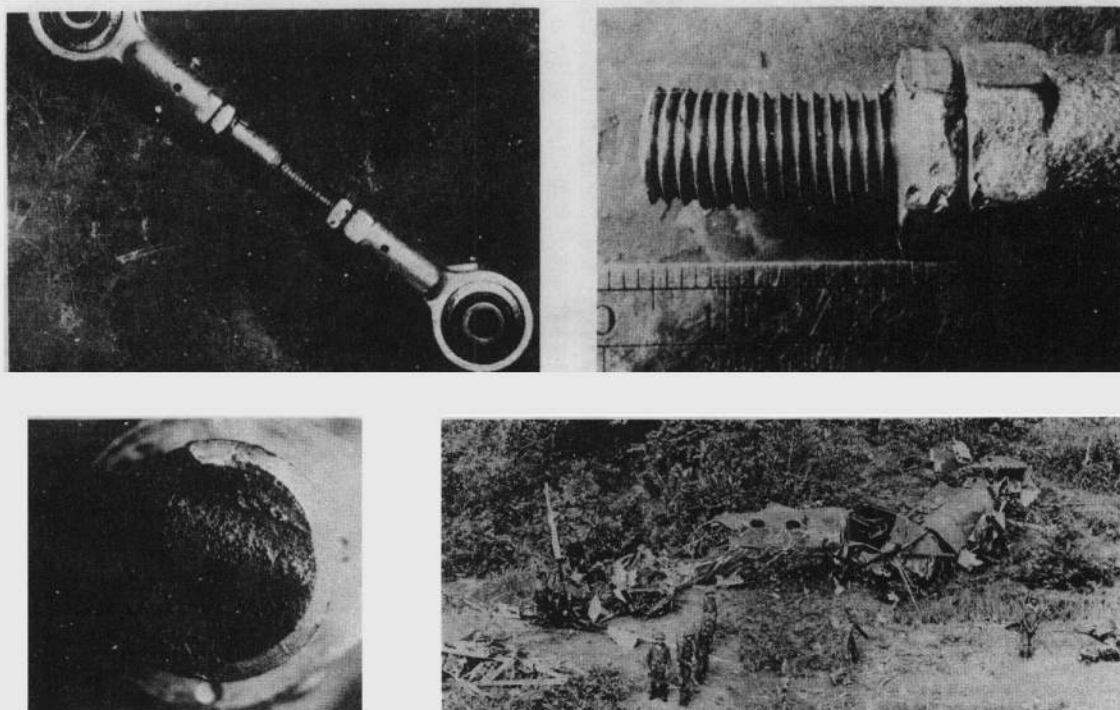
Design and Location of This Link Assembly Made It Susceptible to Side Loads and Bending During Maintenance (Ref. 1)
